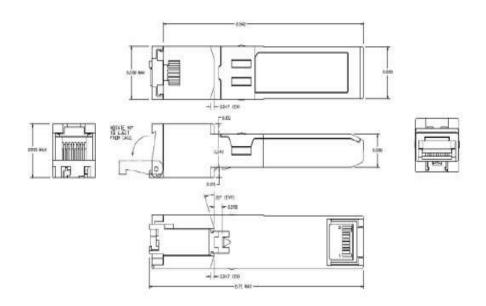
SFP-10/100/1000M-RJ45-100M mechanical dimensions
